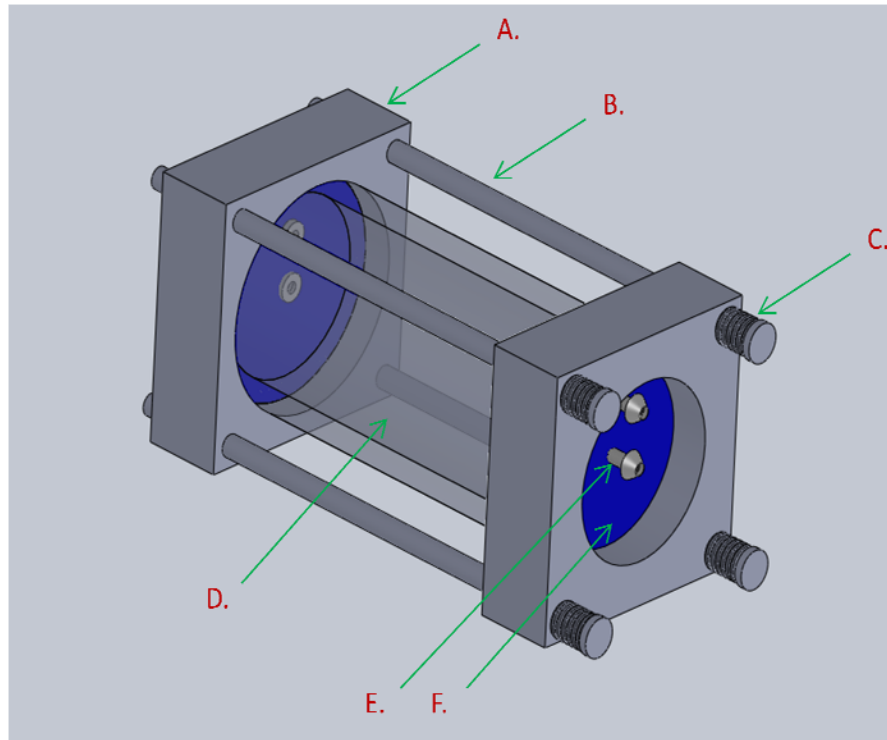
Bioreactor chamber assembly: aluminum end plates (A), bolts (B), springs (C), extruded acrylic tubing (D), luer lock panel mount fittings (E), flexible silicone end plates (F).
